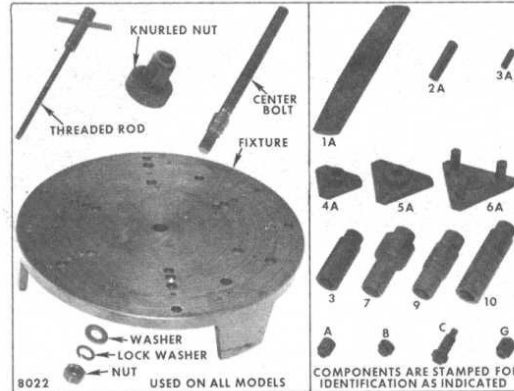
ST-170 Fixture and Components (A711063/68B)
